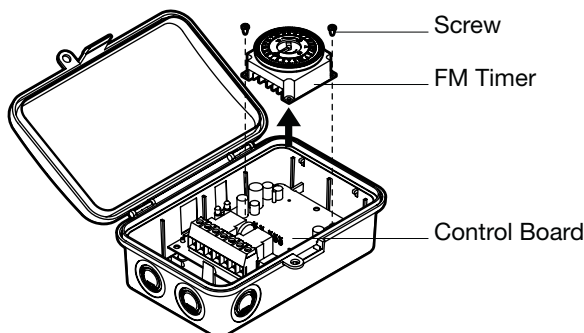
Remove the FM Timer (Enclosed Model Shown)
